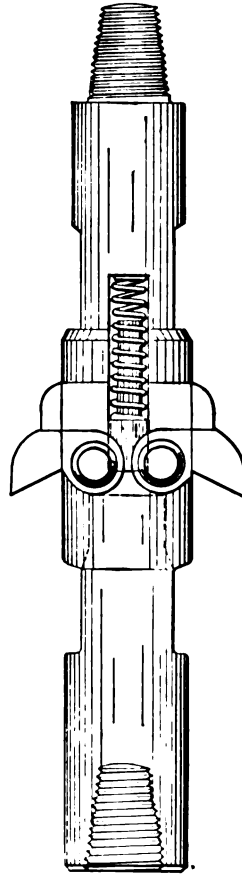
Austrian under-reamer for reaming out drilled holes.
